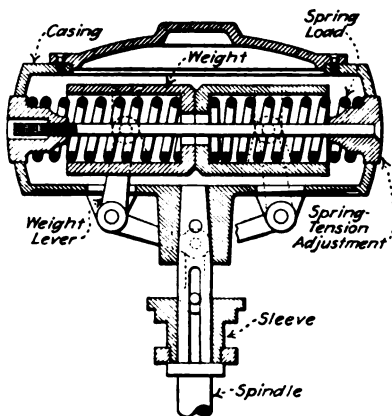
Enclosed-spring governor. (From Hamkens, STEAM ENGINE TROUBLES.)
